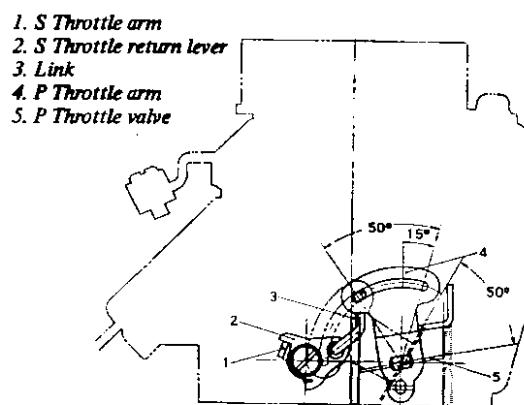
Adjusting the throttle valve interlock opening - D3034C carburettor
